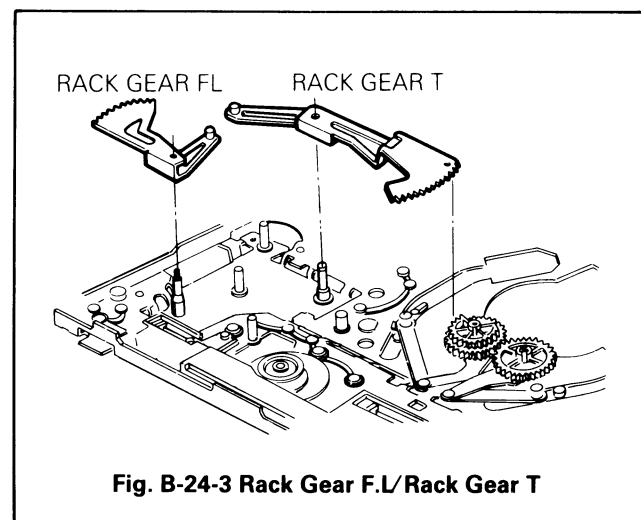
Rack Gear F.L/Rack Gear T
